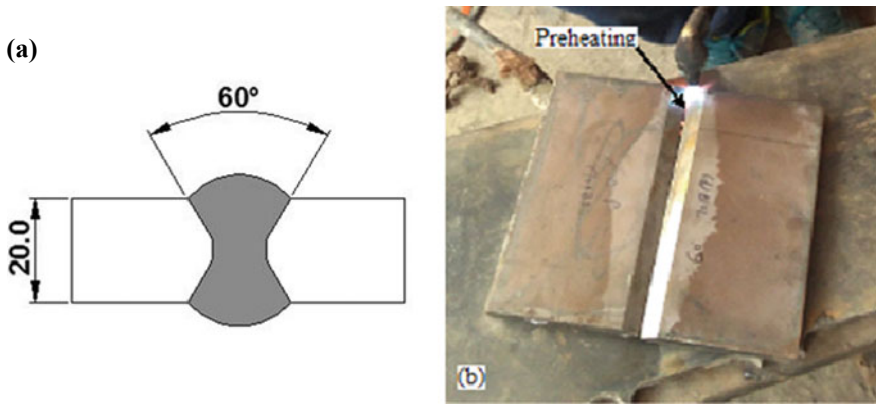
a Double V groove design, b base metal plate after machining and illustrating preheating
